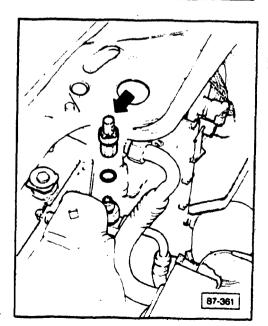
A/C refrigerant high pressure switch (4-cylinder engine)
